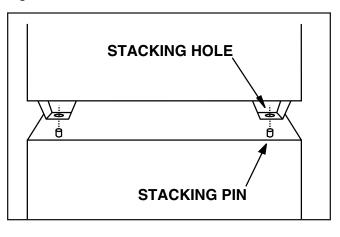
Stacking IDEALARC CV-300 machines.
